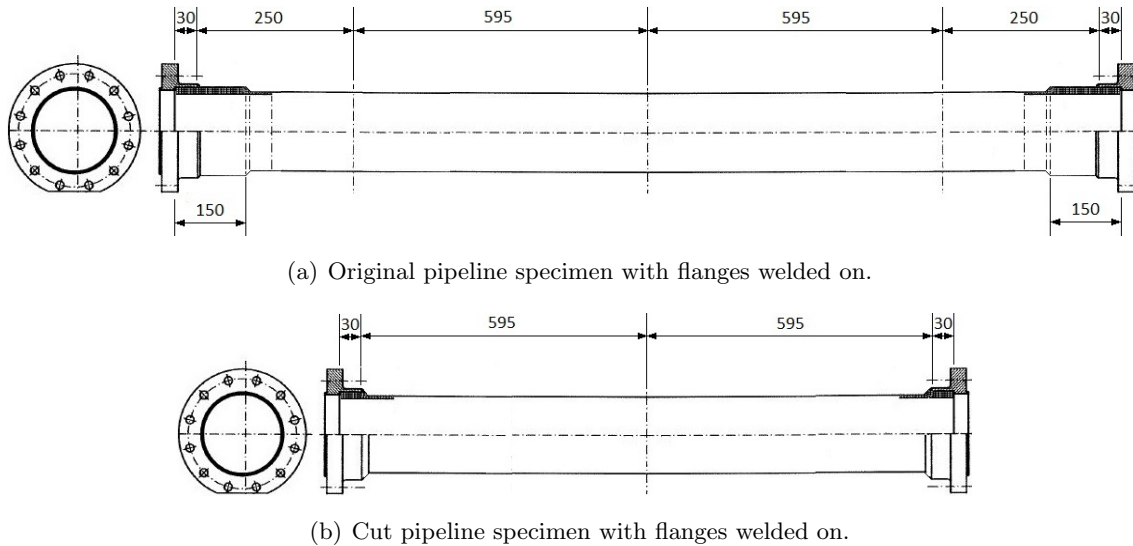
Sketches of original and cut pipeline specimens with flanges welded on.
